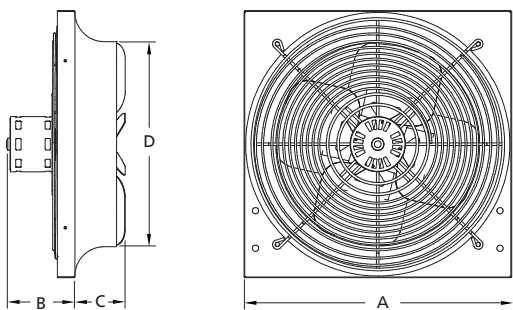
Commercial With Intake Guard 8-18 Dimensions
